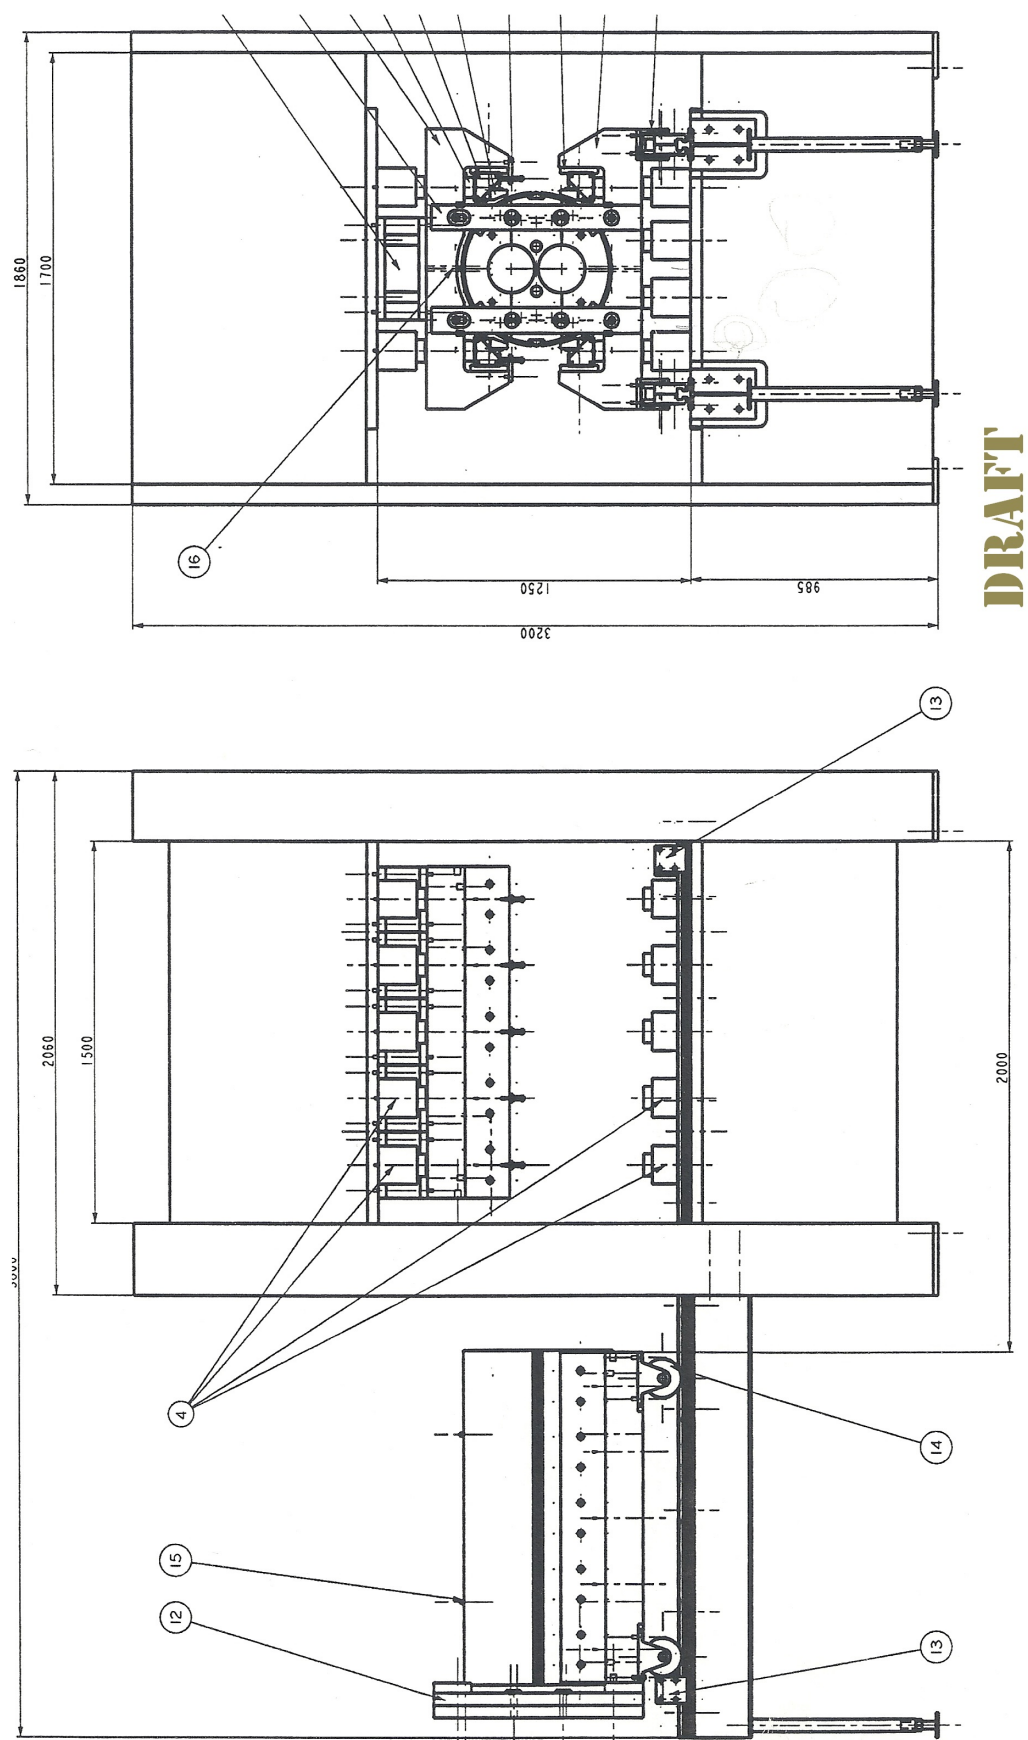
Obsolete dimensions of the unmodified design: The press with the magnet assembly inside the original cradles, and a magnet assembly on the original sledge.
